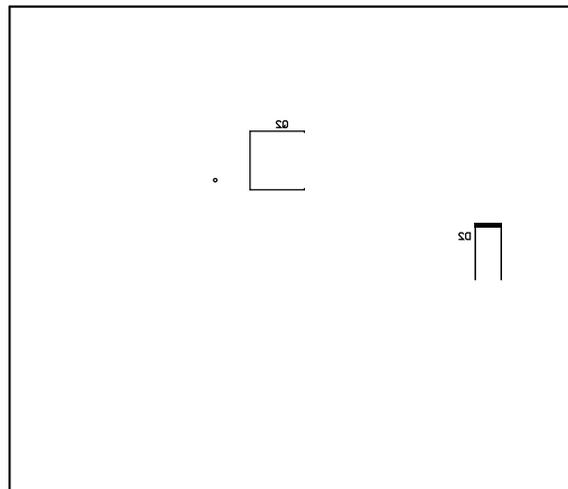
LM74501-Q1EVM Bottom Side Placement
